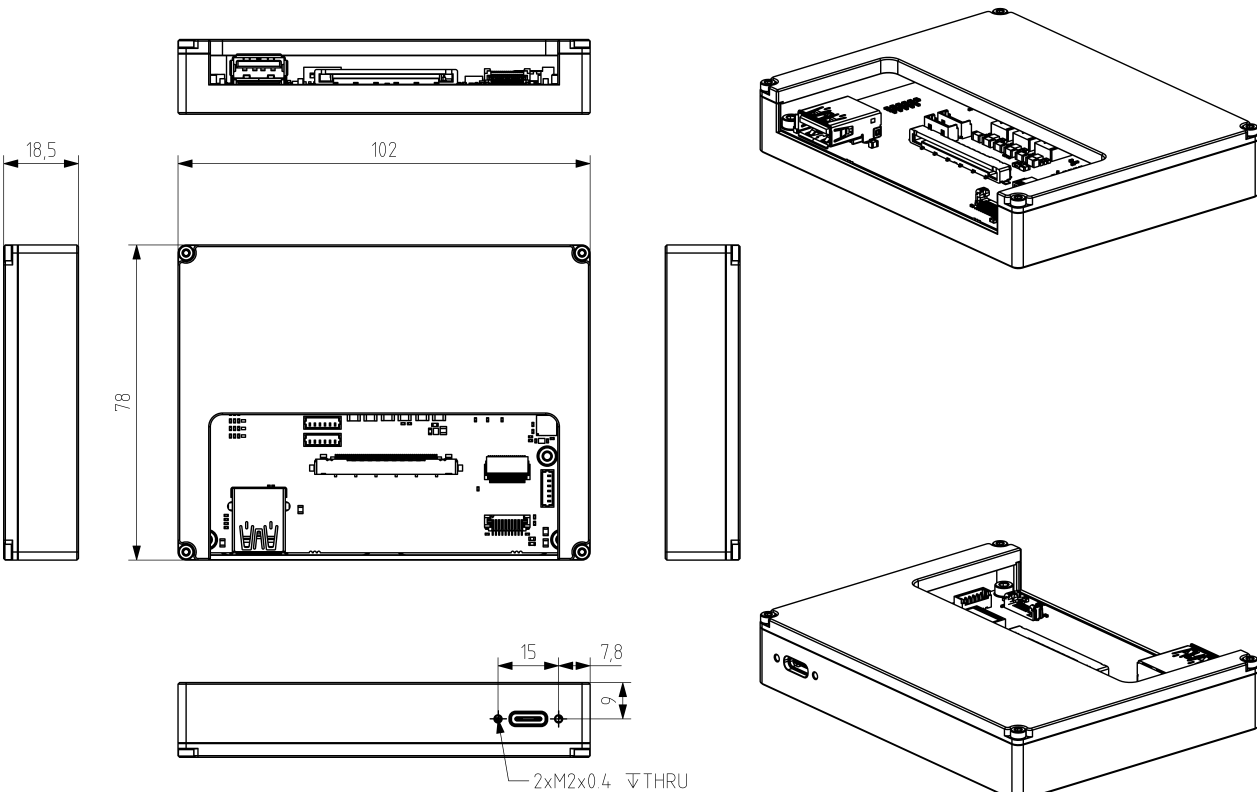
Dimensional drawing of XS-2P-X4G3-TBT3-B
